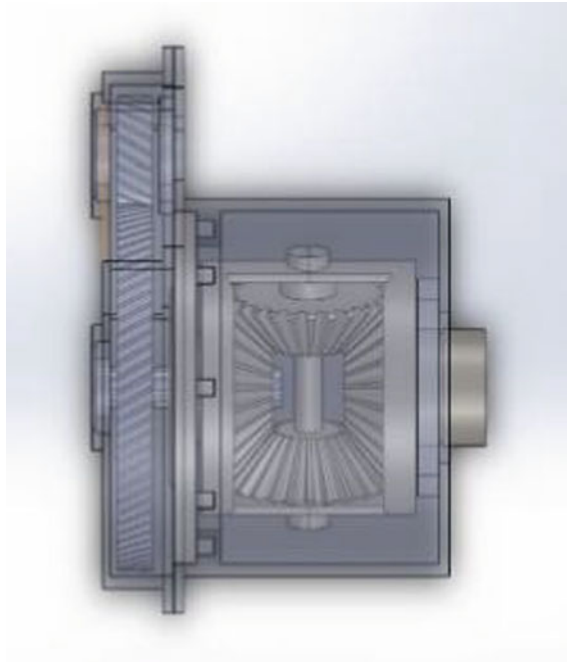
Assembled CAD of the parallel hybrid gearbox
